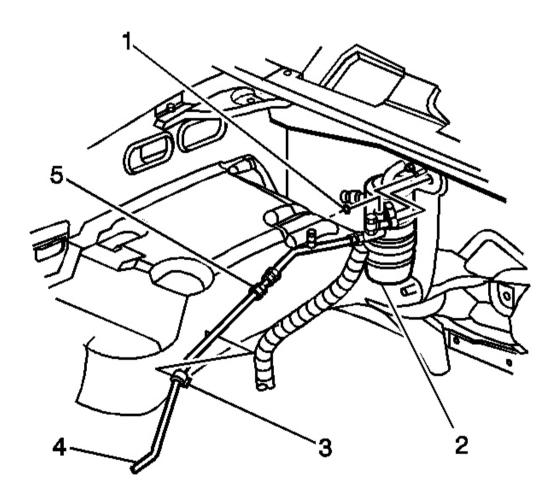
A/C Refrigerant Filter & Evaporator Tube Courtesy of GENERAL MOTORS CORP.
